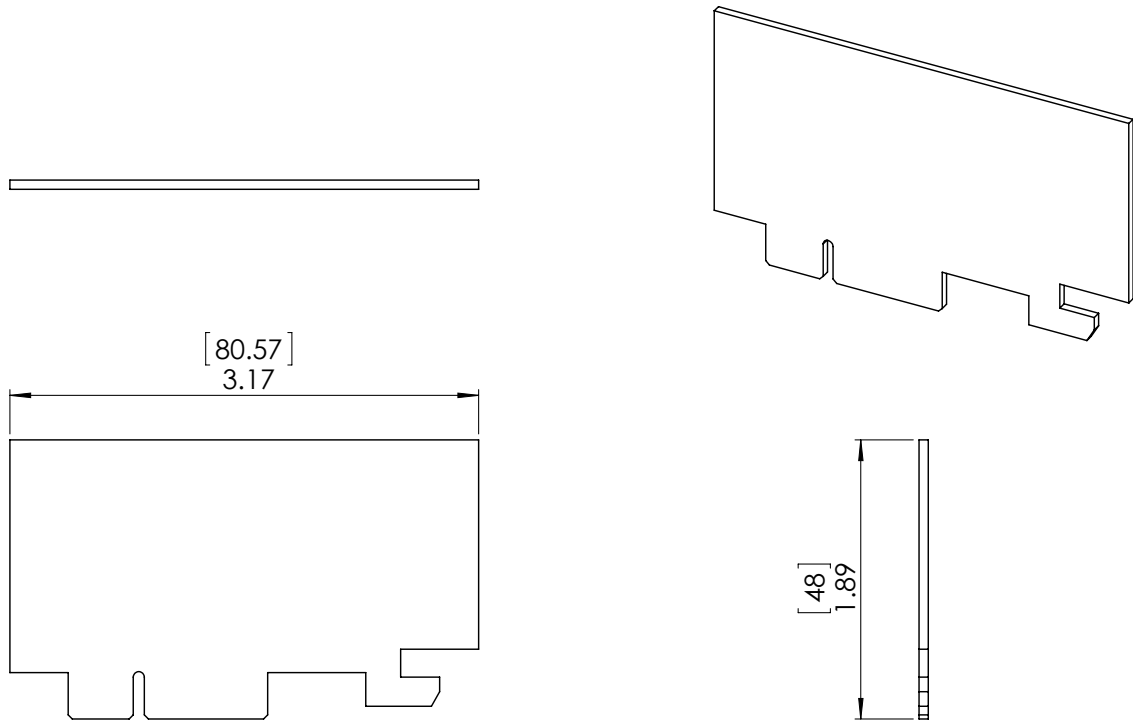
MTM 1-Channel Power Module mechanical dimensions shown in inches [mm].
